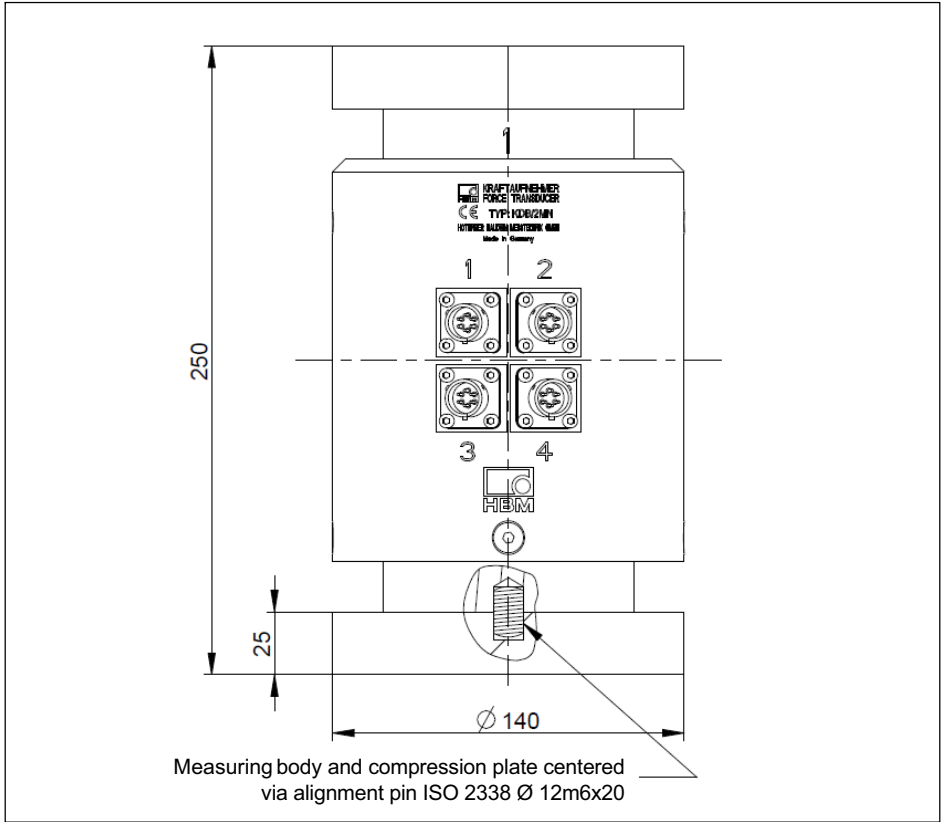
Dimensions of the force-proving instrument with hardened plates mounted (for use in checking material testing machines for building materials)
